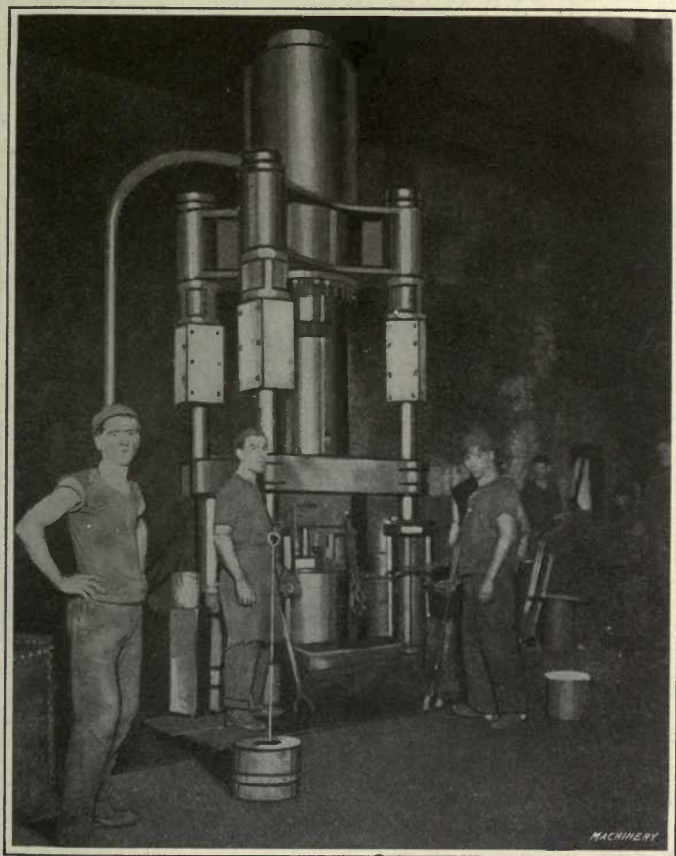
Forging British 4.5 High-explosive Shells in One Operation
